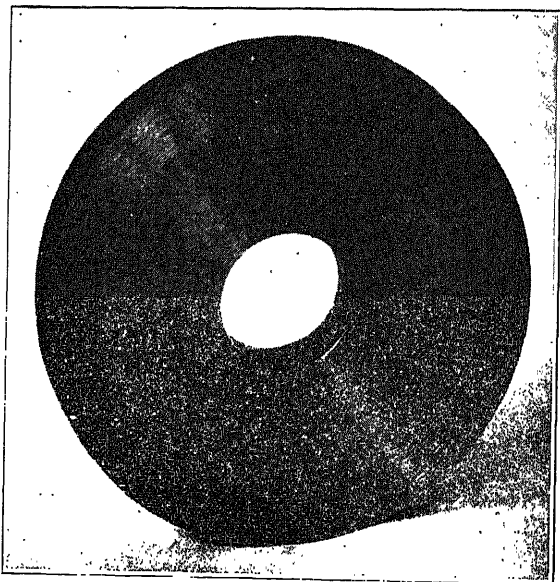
Tungsten High-Speed Ring Automatically Welded by Metallic-Electrode to Cold-Rolled Core to Form Milling-Cutter Blank.
